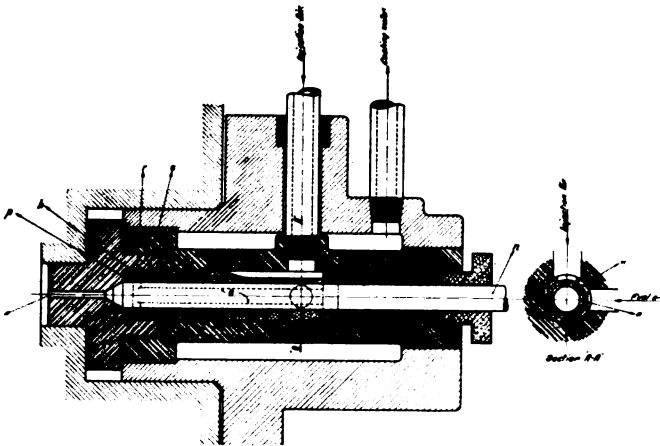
ATOMIZER OF AMERICAN DIESEL ENGINE
